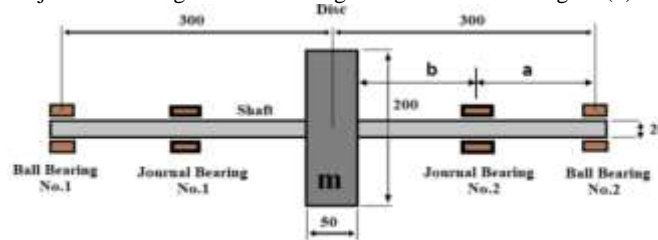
Flexible rotor mounted on two ball bearing with two additional journal
